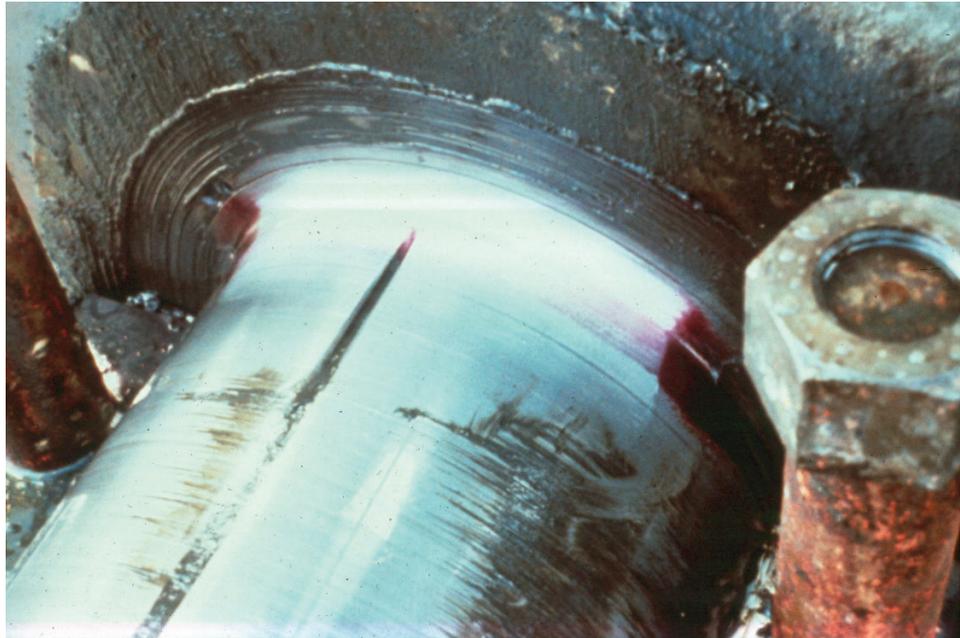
Hairline Crack Revealed on Shaft from Dye Penetrant Test
